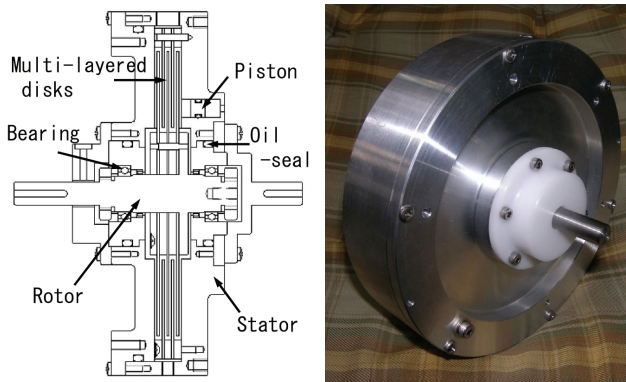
ER Brake: Sectional view (left) and picture (right)
